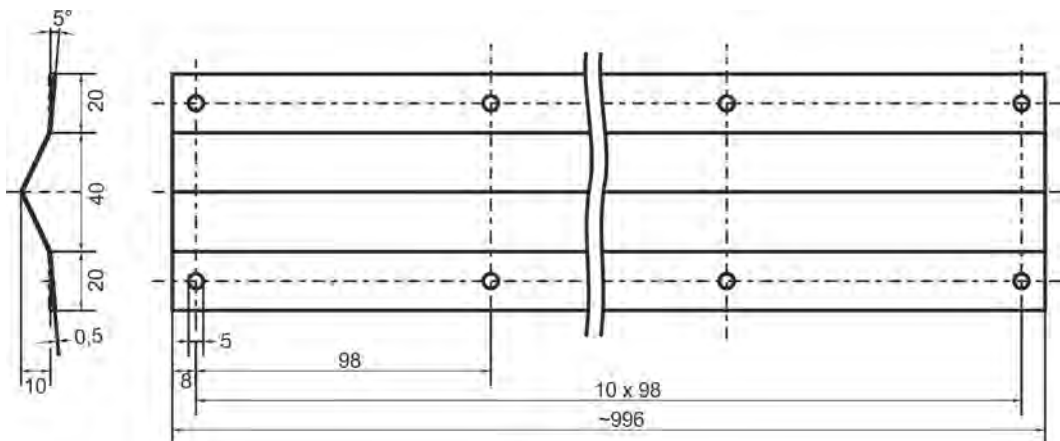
Dimensional drawing cable protection sheet Type ZMS 140
